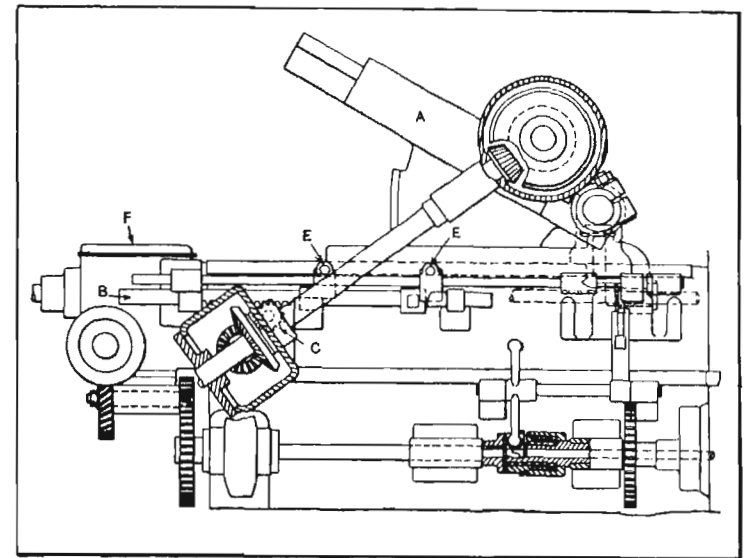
Independent Method of Controlling Reversal of an Adjustable Slide on a Bevel Gear Cutting Machine
